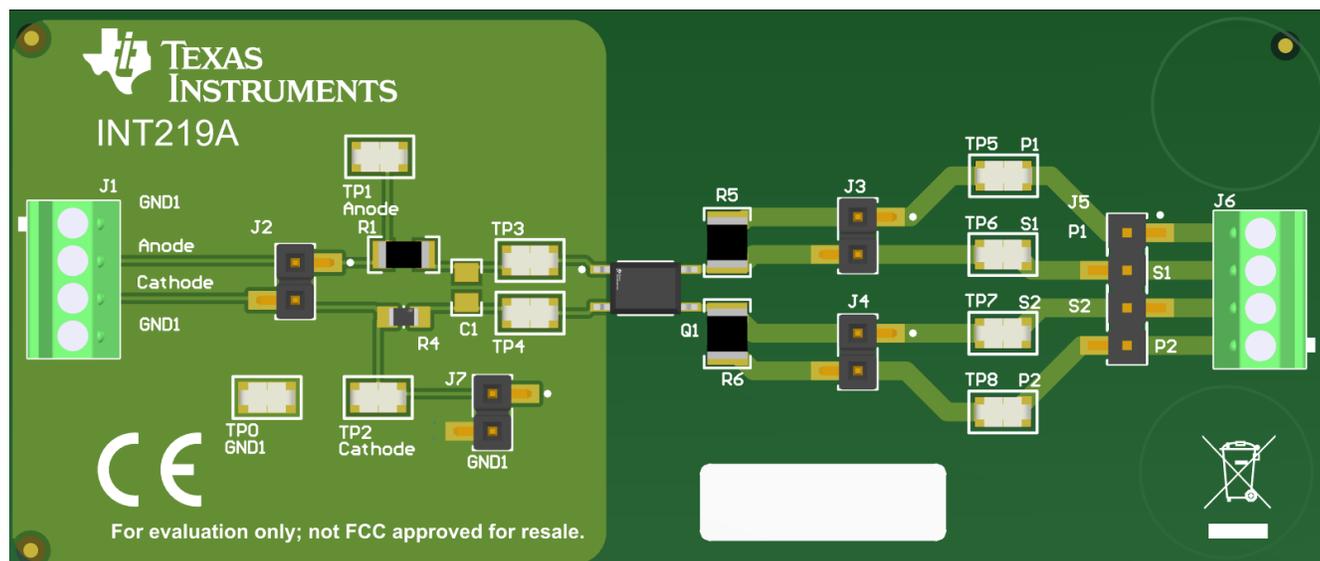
Layout Example of ISOM8610 With a 2-Layer Board
